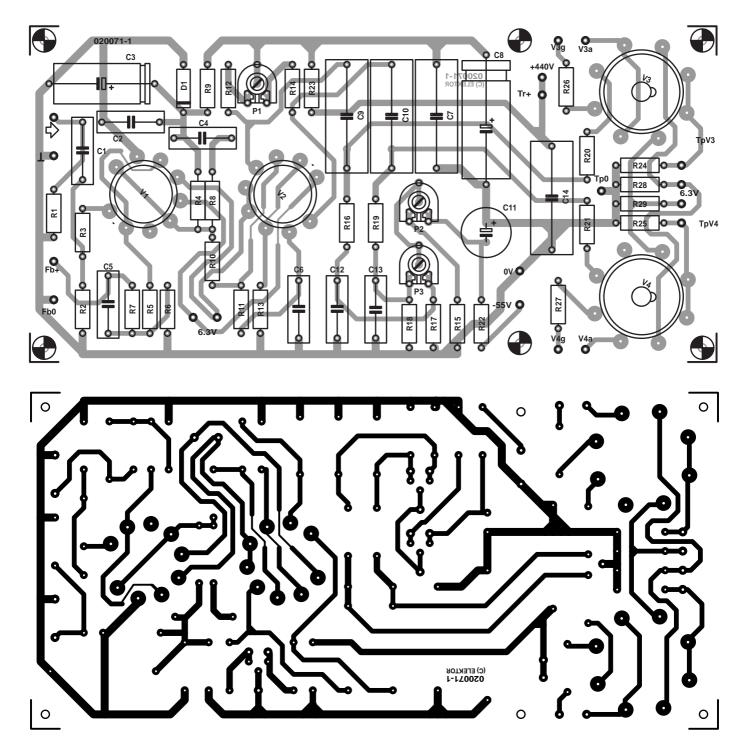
Copper layout and component layout of the printed circuit board for one amplifier channel.
